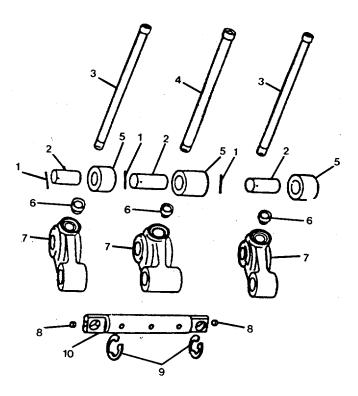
Cam Followers. Cover and Push Rods/Tube.
